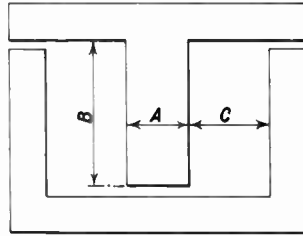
DIMENSIONS OF CORE STAMPINGS DETAILED IN TABLE I.
